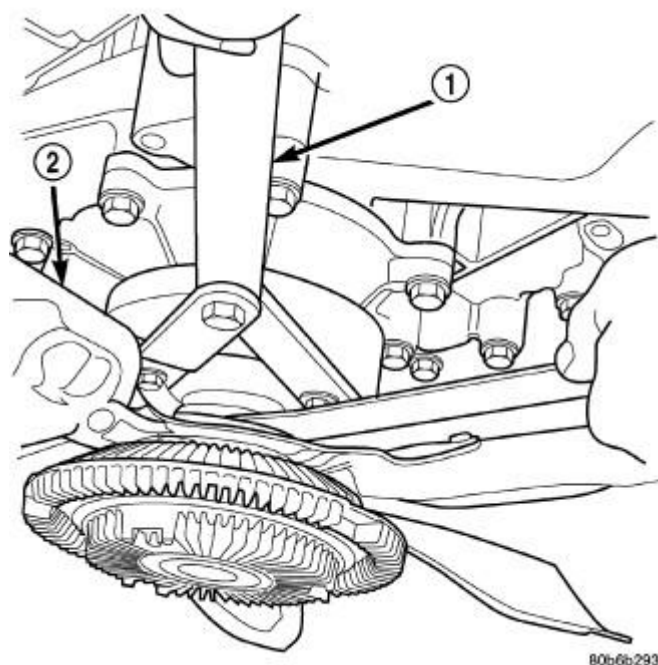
Identifying Adapter Pins (8346) And Fan/Viscous Fan Drive Assembly
